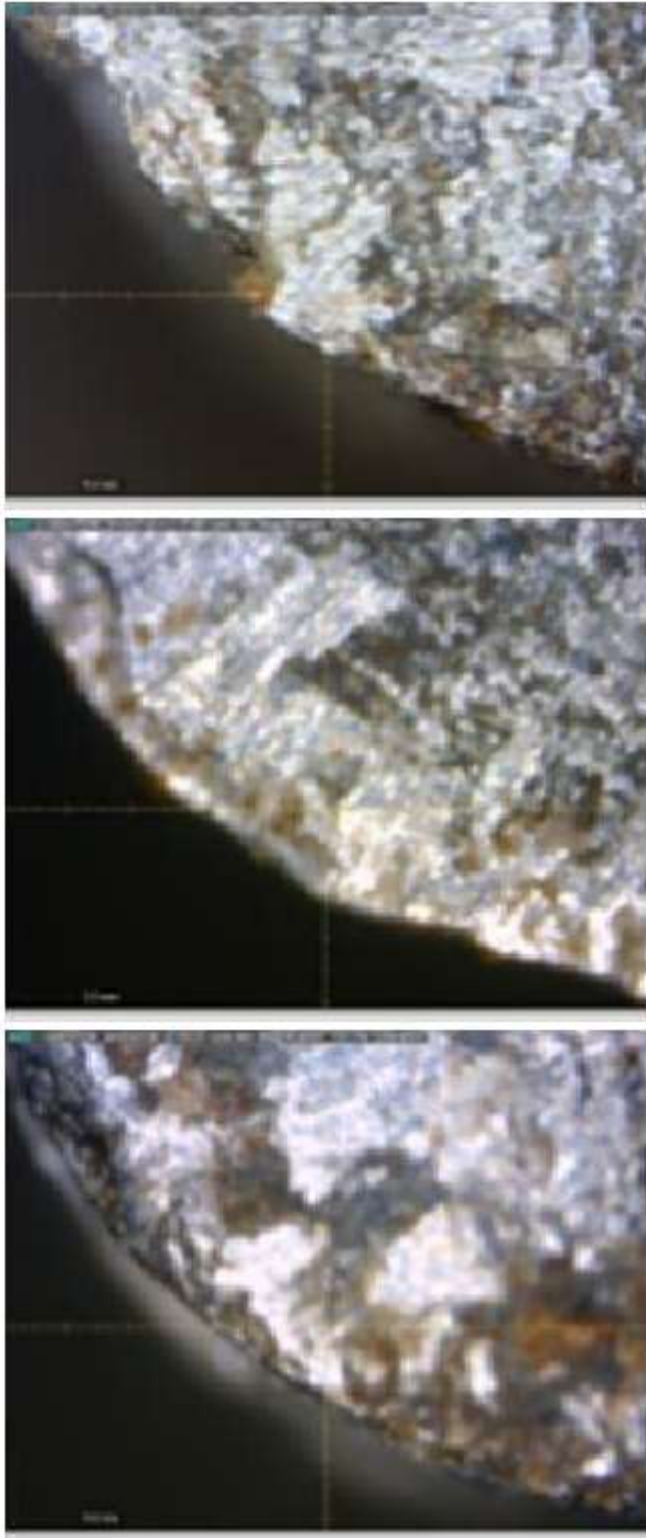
Optical micrographs at rake surface of ADI cutting tool with nitrogen cooling treatment, soaking 48 hours, continued by turning process V_c : 70 mm/min, f : 0.1 mm/rotation, for Al T-6061 a. Cutting depth a : 0, 1 mm b. Cutting depth a : 0, 5 mm c. Cutting depth a : 1, 0 mm
